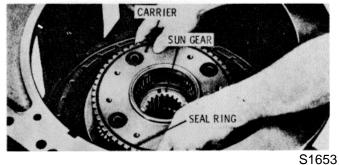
Installing Intermediate-Range Planetary Carrier Assembly
